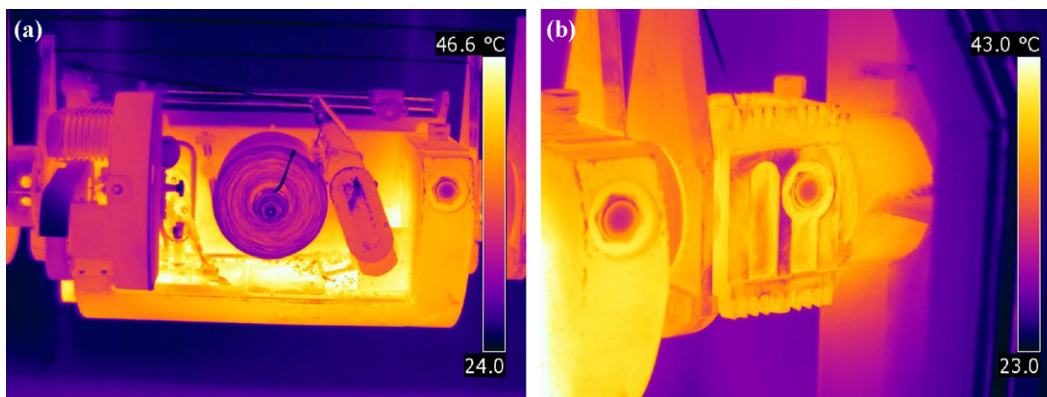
IR image of temperature fields inside twisting machine. (a) The cradle. (b) The epicycle and bearing A₂.
